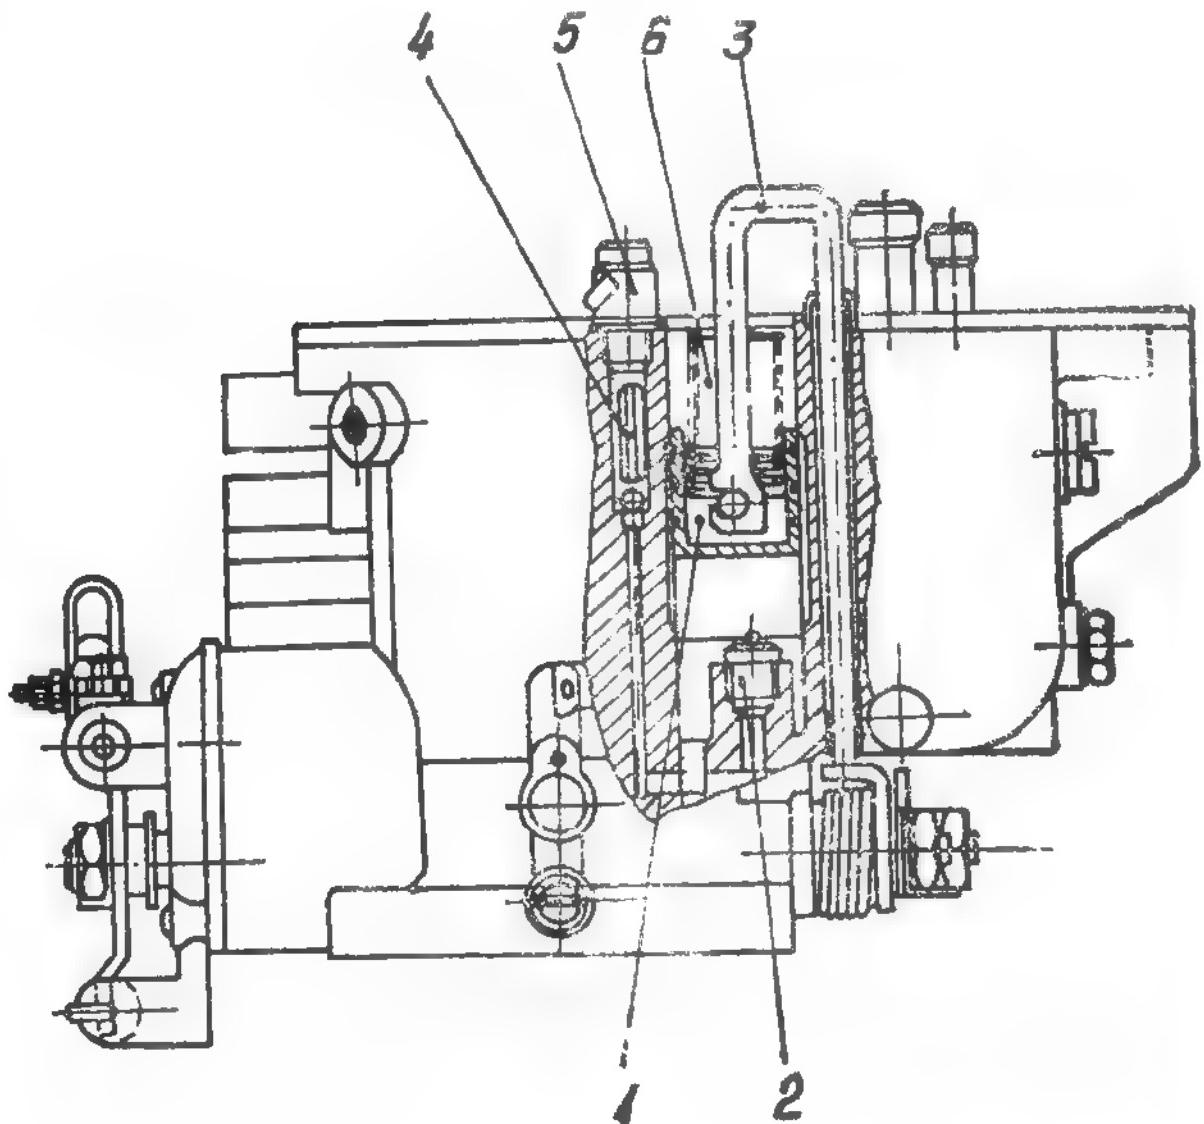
CARBURETTOR ACCELERATION MECHANISM
